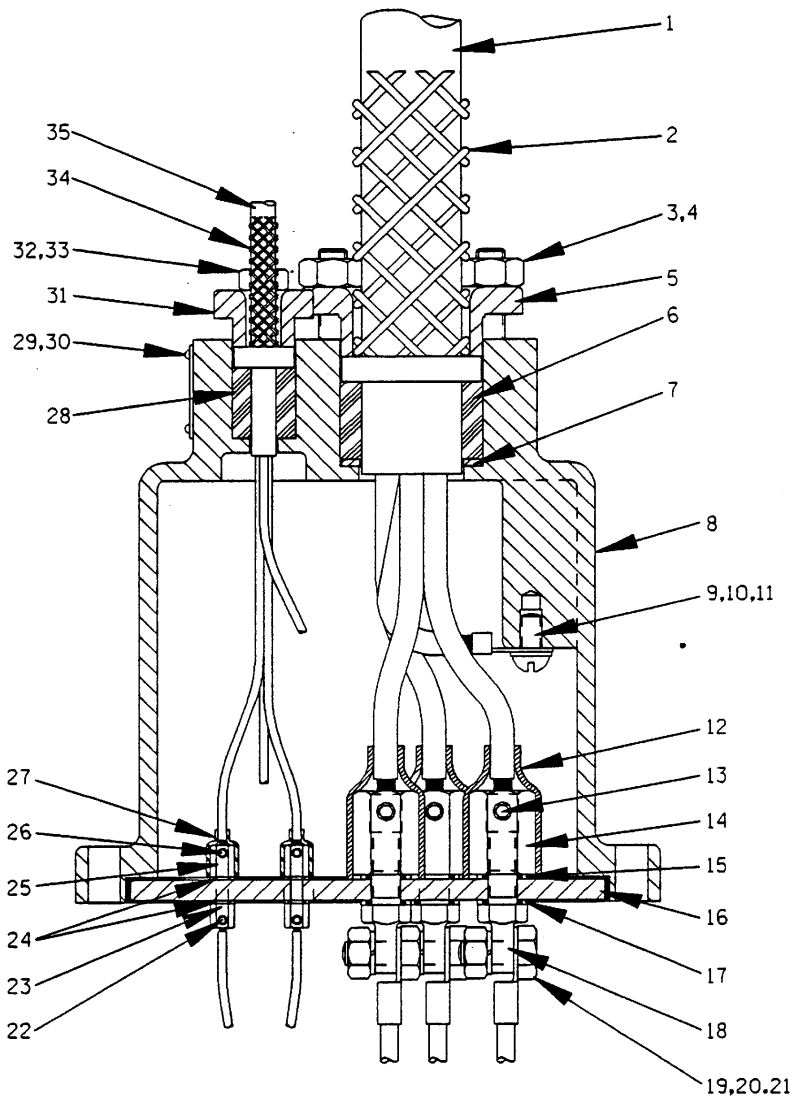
47367-074 Terminal Housing And Cable Assembly
